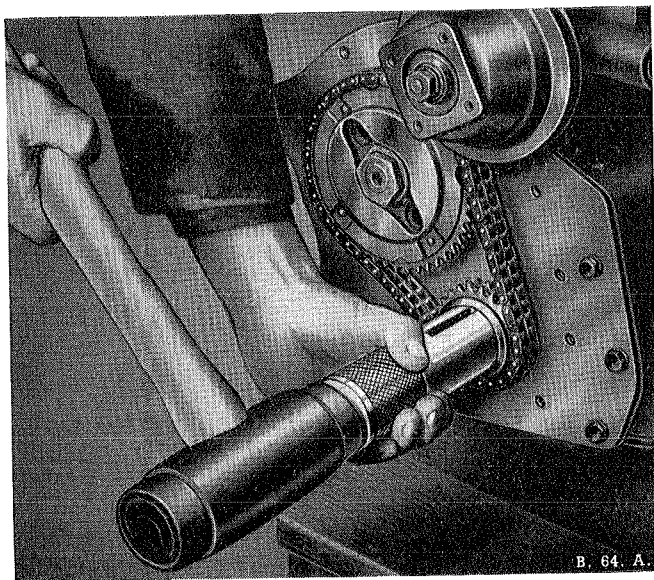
Crankshaft gear replacer tool No. 18G 16.
